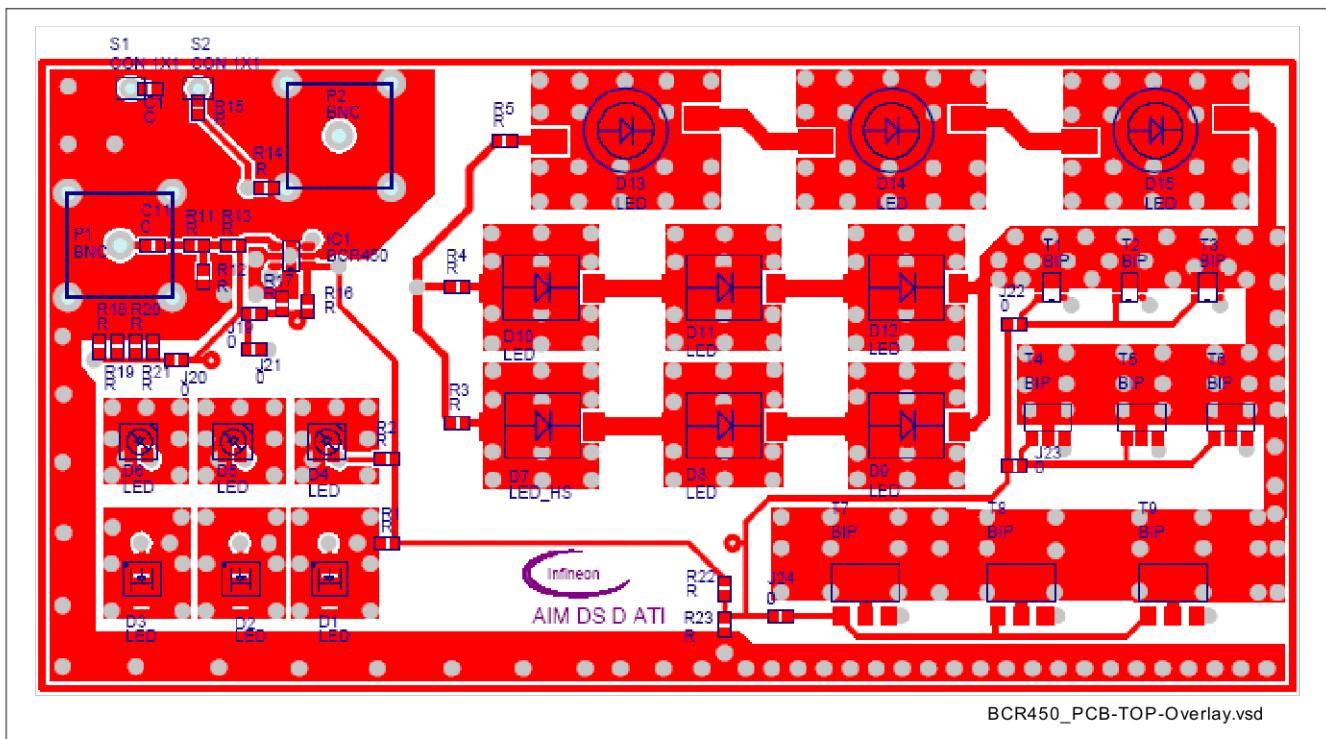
Top view on evaluation board (dimension 60 mm x 120 mm)
